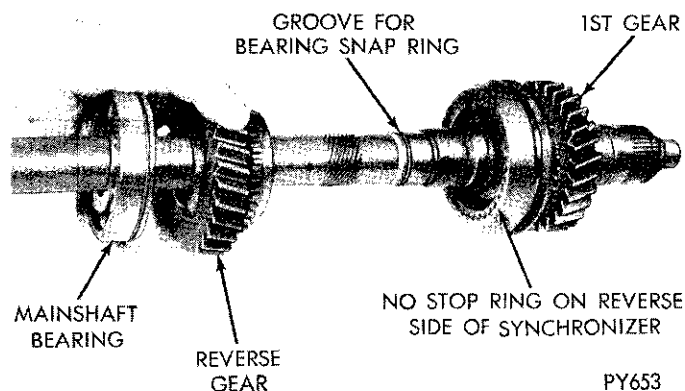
Reverse Gear and Mainshaft Bearing—Removal or Installation
